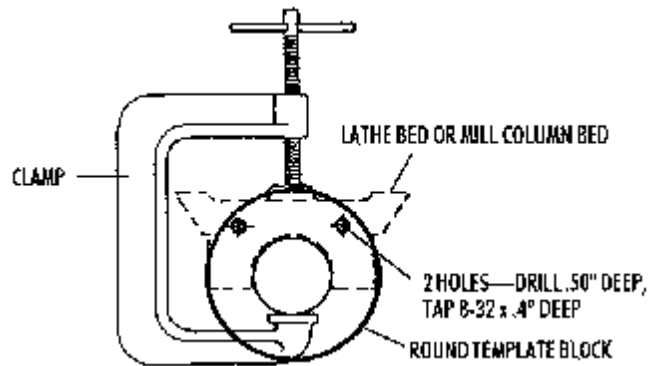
The round center of the template block (P/N 67116) registers in the center portion of the lathe bed. Rotate the template until the holes are level and clamp in place while starting holes. (Again, newer lathes may already have these holes in place.)
